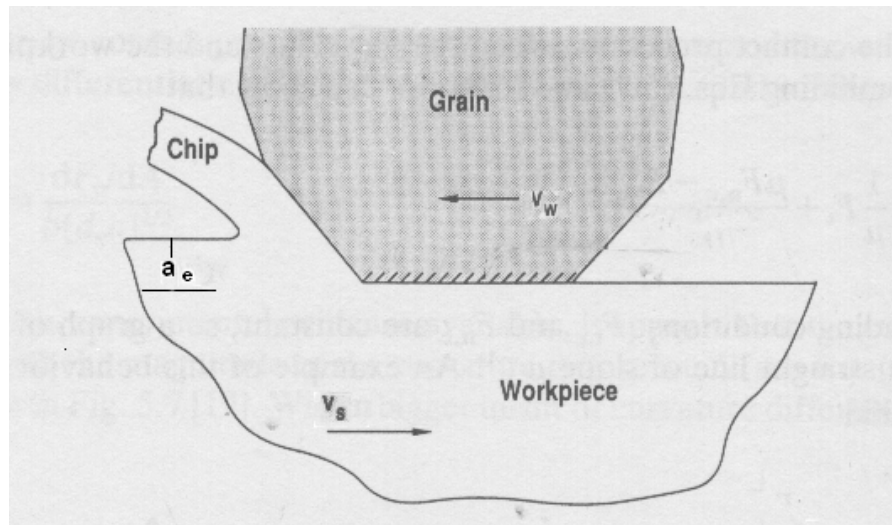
Material removal during grinding by ductile chip formation [2]
